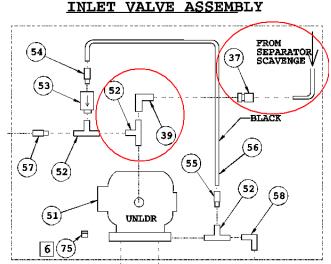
Air Intake location of scavenge line. Plug installed in the side of the compressor. Additional elbow located at the inlet valve assembly for scavenge line piping.
